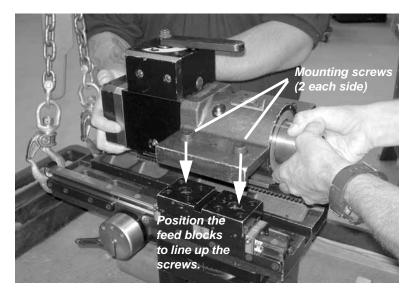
Set the gearbox and spindle assembly onto the feed blocks.
